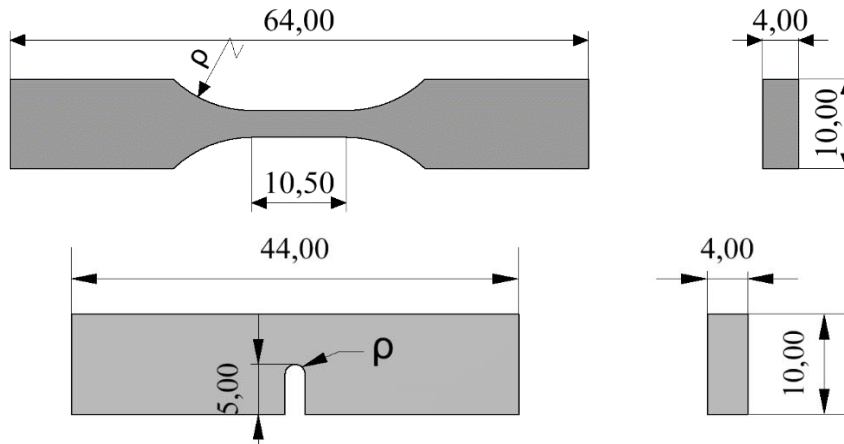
Specimens dimensions used for the fracture and tensile tests respectively.  $\rho$  is assumed to be 0 mm (crack-like defects).
